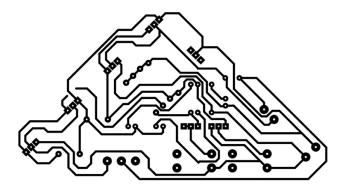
PCB Design pdf of the Motor Driver Circuit
